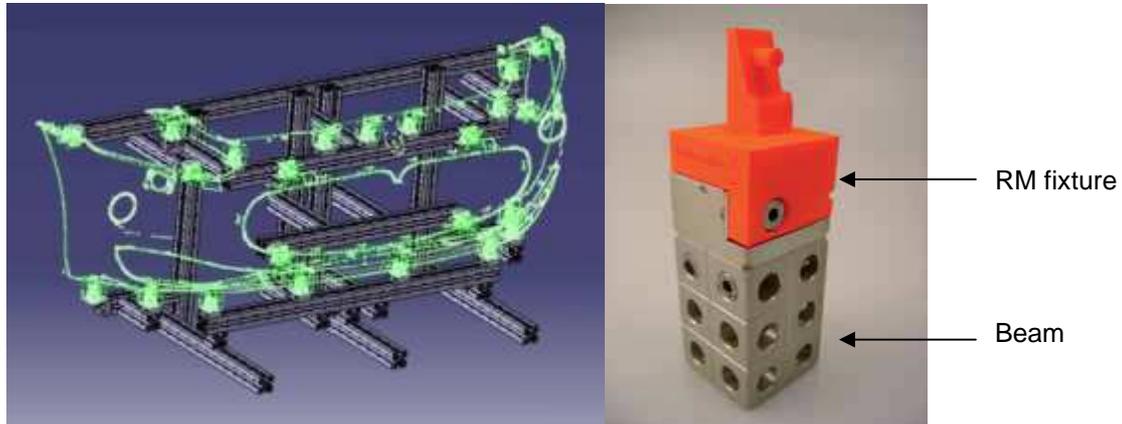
RapidFit bumper CAD model (left) & RapidFit fixture on Alufix modular beam (right)
